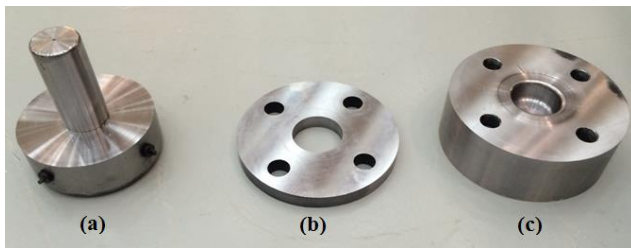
The manufactured die set for the deep drawing process: (a) Punch, (b) Blank Holder, and (c) Die.
